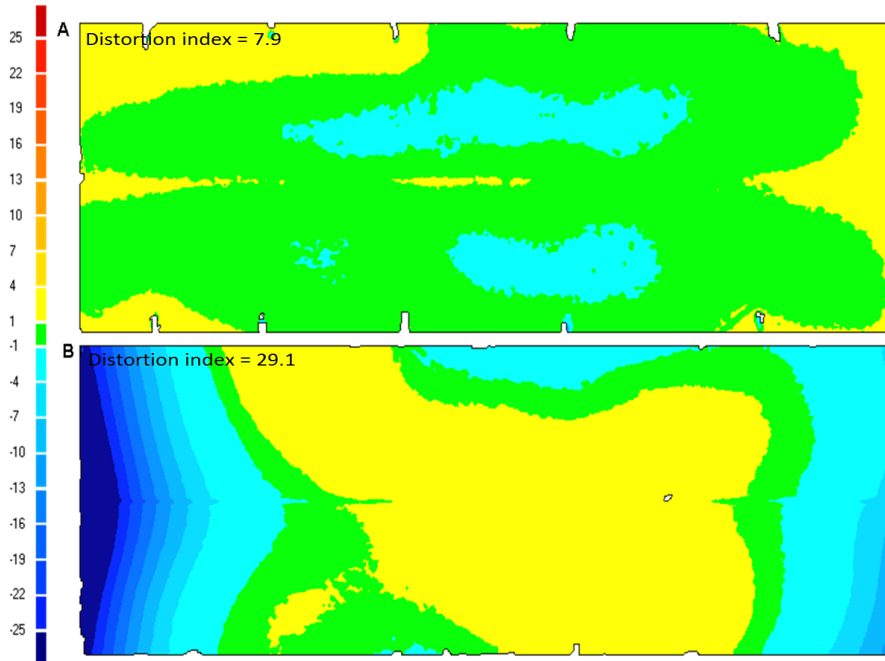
The out-of-plane deformation of AH36 plate for different situations in test 7: (a) initial deformation after tack welds, (b) the final out-of-plane deformation after side heating during conventional welding of the two passes with burners with 45° to the weld centre line. The scale is -25 mm to +25mm.
